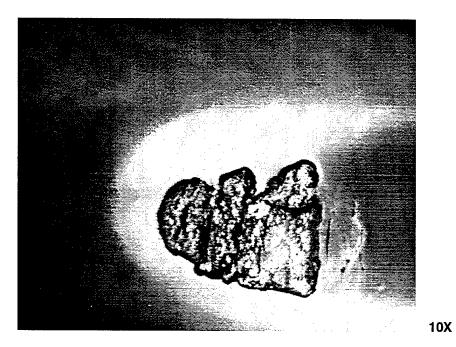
SEM Photo of GE TDC 45 Inner Ring Spall from MRC Round 1. TDC plated bearing, 802 hours, one of three plated bearing failures.
